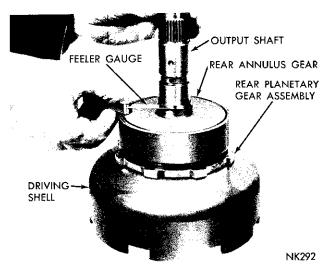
Measuring End Play of Planetary Gear Assembly, Sun Gear and Driving Shell
